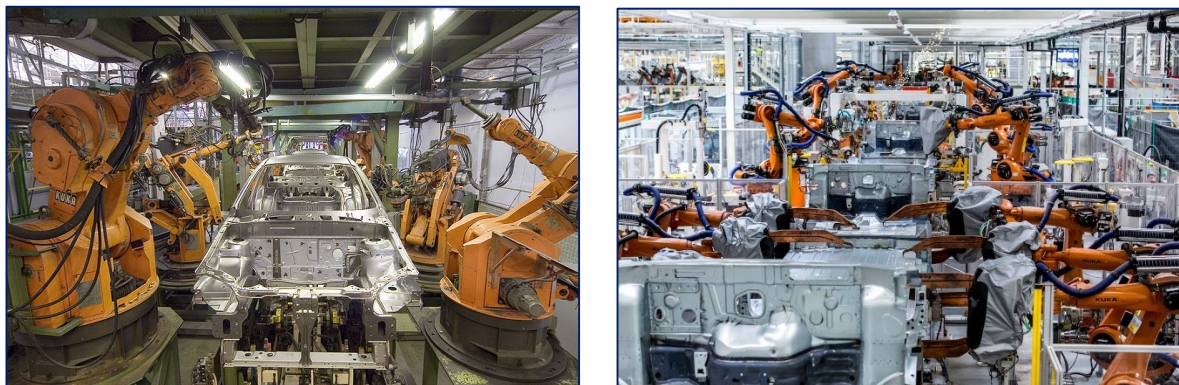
Application of Welding in Automotive Industry [6]
